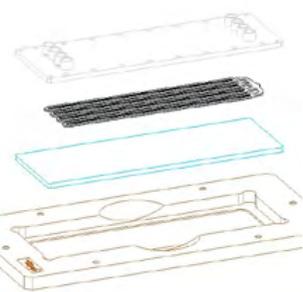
Schematic drawing of assay chip 4, Fluidic 638
